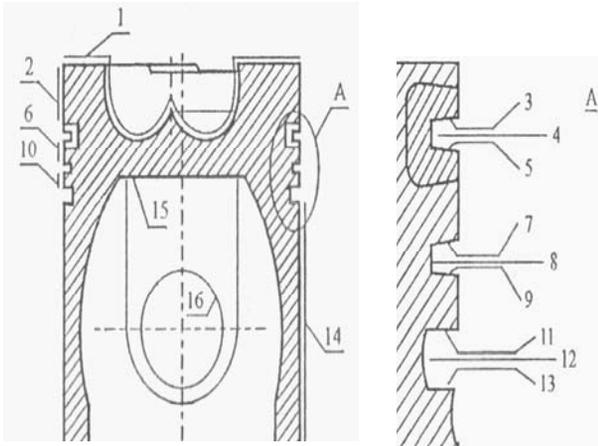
Surfaces of the heat exchange of the piston; surface: 1 – piston head, 2 – flank piston over I ring, 3 – upper groove of I ring, 4 – bottom groove of I ring, 5 – under groove of I ring, 6 – between rings I-II, 7 – upper groove of II ring, 8 – bottom groove of II ring, 9 – under groove of II ring, 10 – between rings II-III, 11 – upper groove of III ring, 12 – bottom groove of III ring, 13 – under groove of III ring, 14 – skirt of the piston, 15 – internal of the piston, 16 – the point of contact of the piston pin with the piston ring
